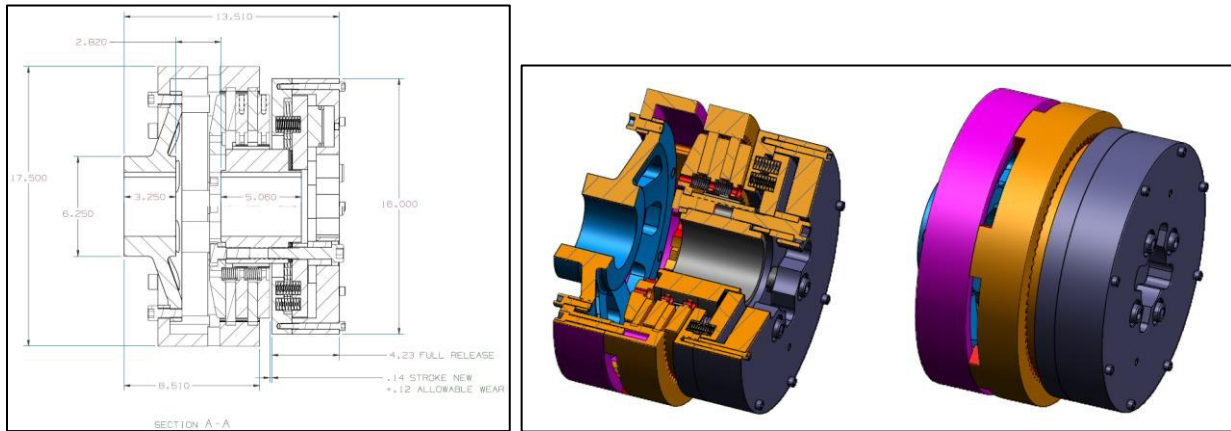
Clutch cutaway drawing (left) and CAD Isometric views (right). Note all dimensions are in inches. Provided by Wichita Clutch (Altra Industrial Motion).
